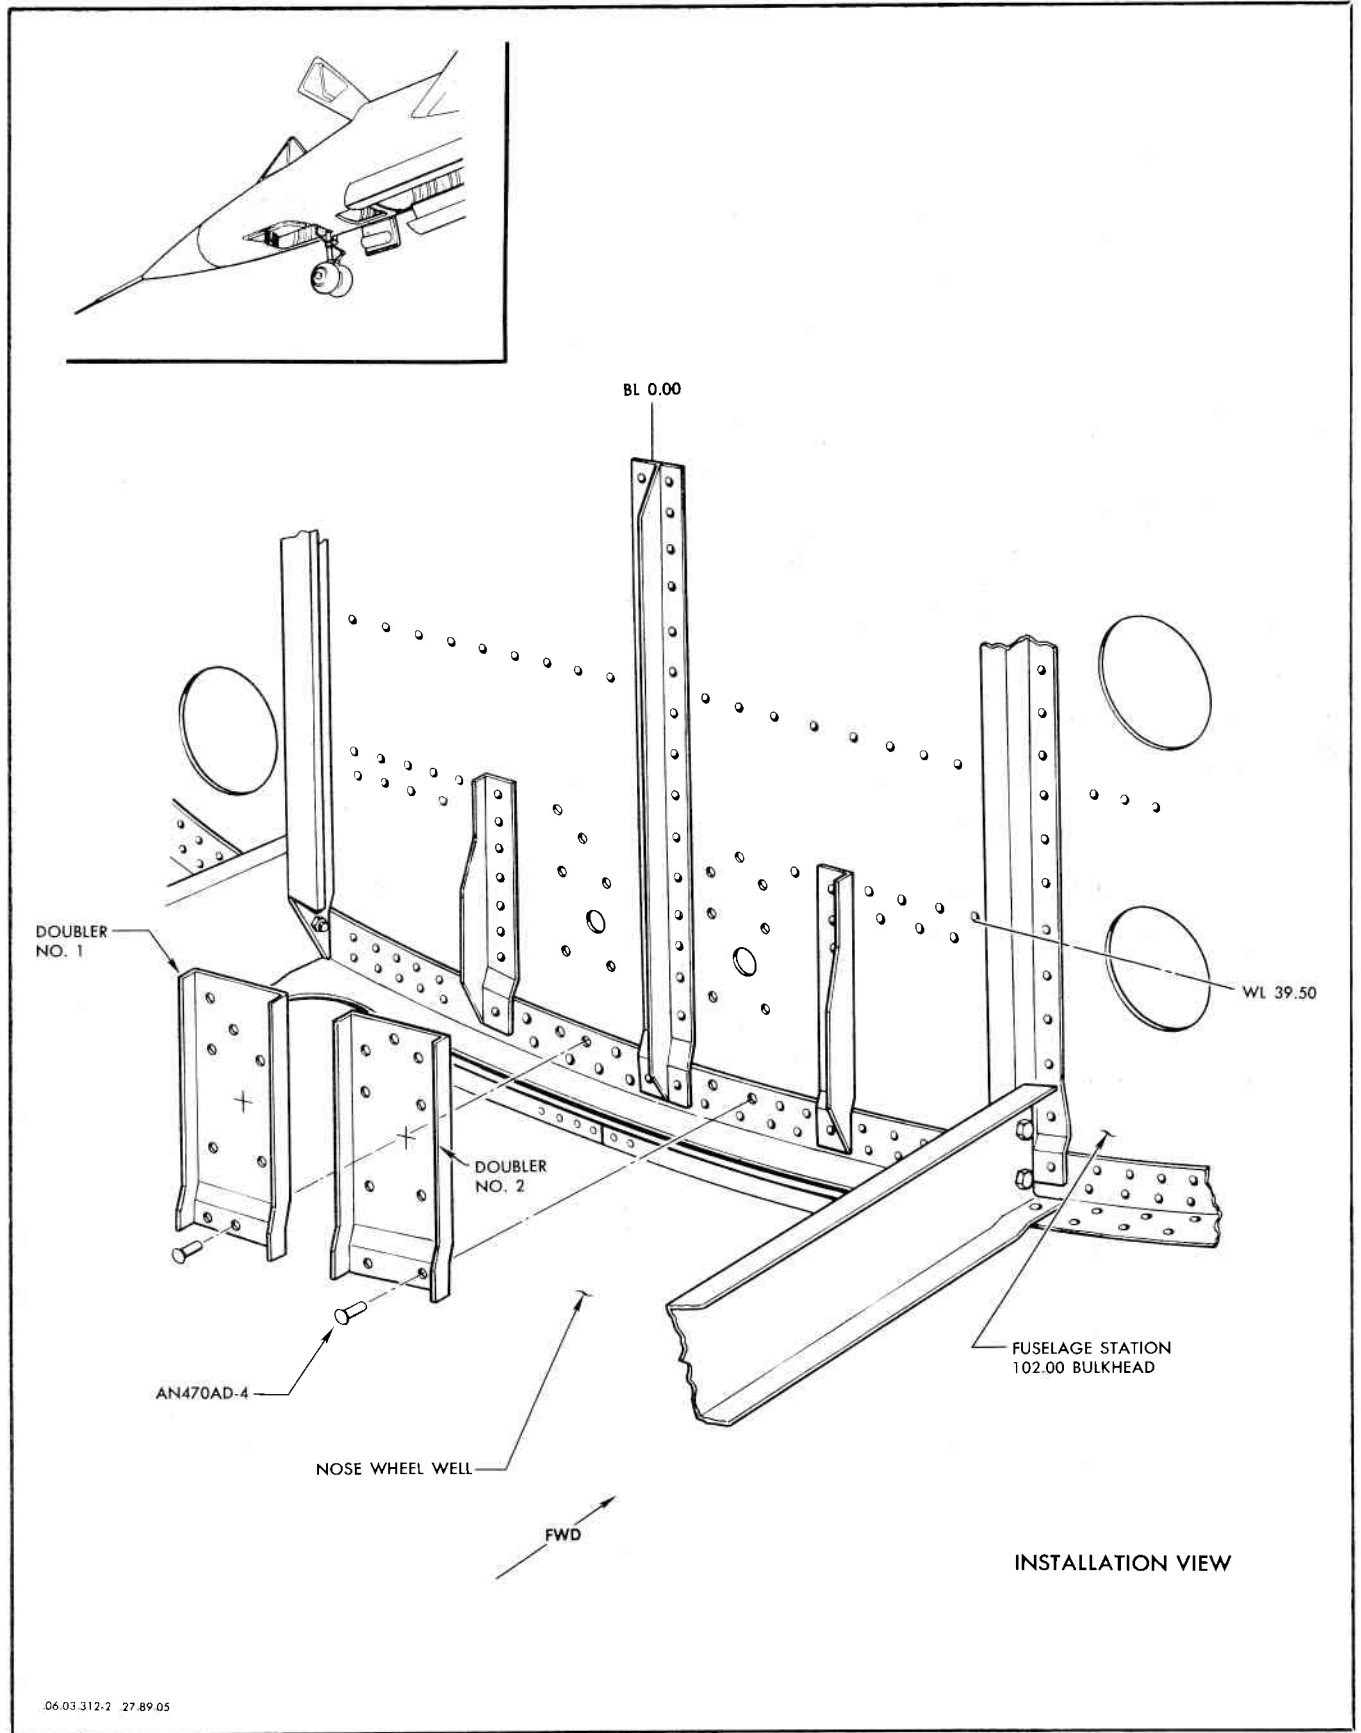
Airspeed Tubing Drain Trap Reinforcement — Station 102.00 Bulkhead (Sheet 2 of 2)
